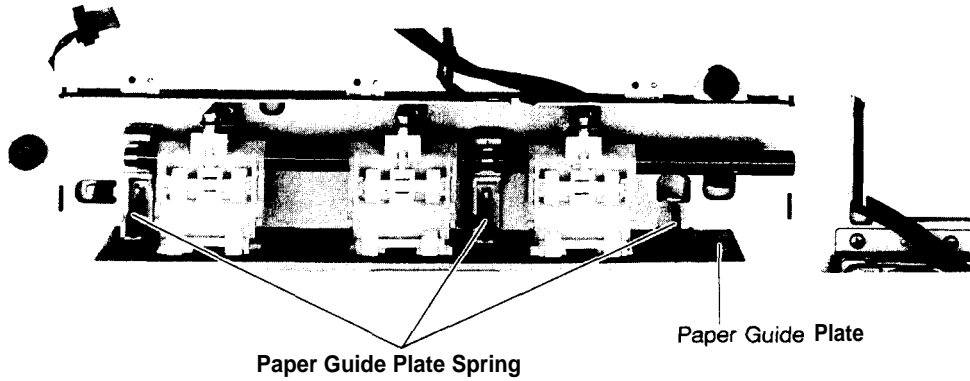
Paper Guide Plate Spring and Paper Guide Plate Removal
